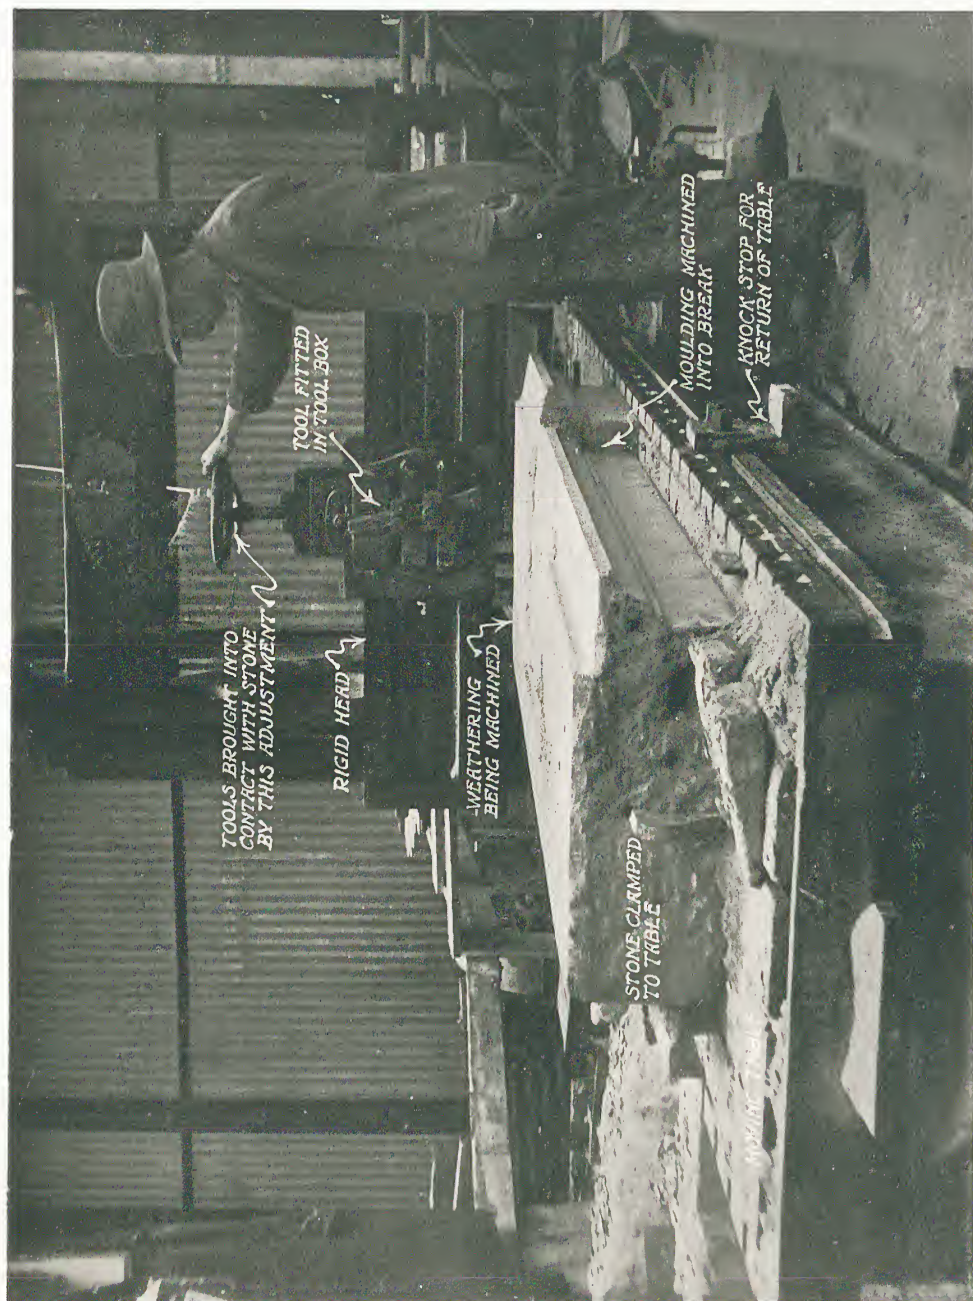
RIGID HEAD TYPE OF PLANING MACHINE.
